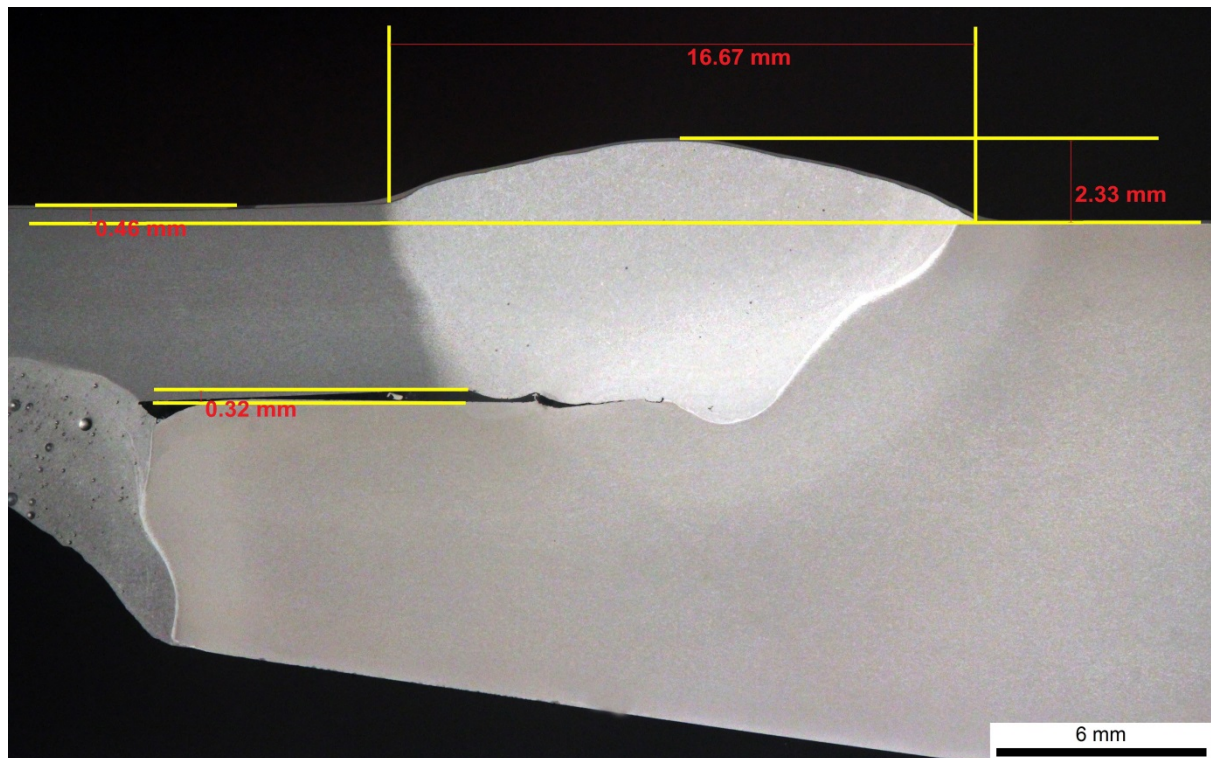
J3564 sample W03-04, slice 2, left side of Figure I33. No defect of note in the joint, scattered porosity in the internal fillet weld.
